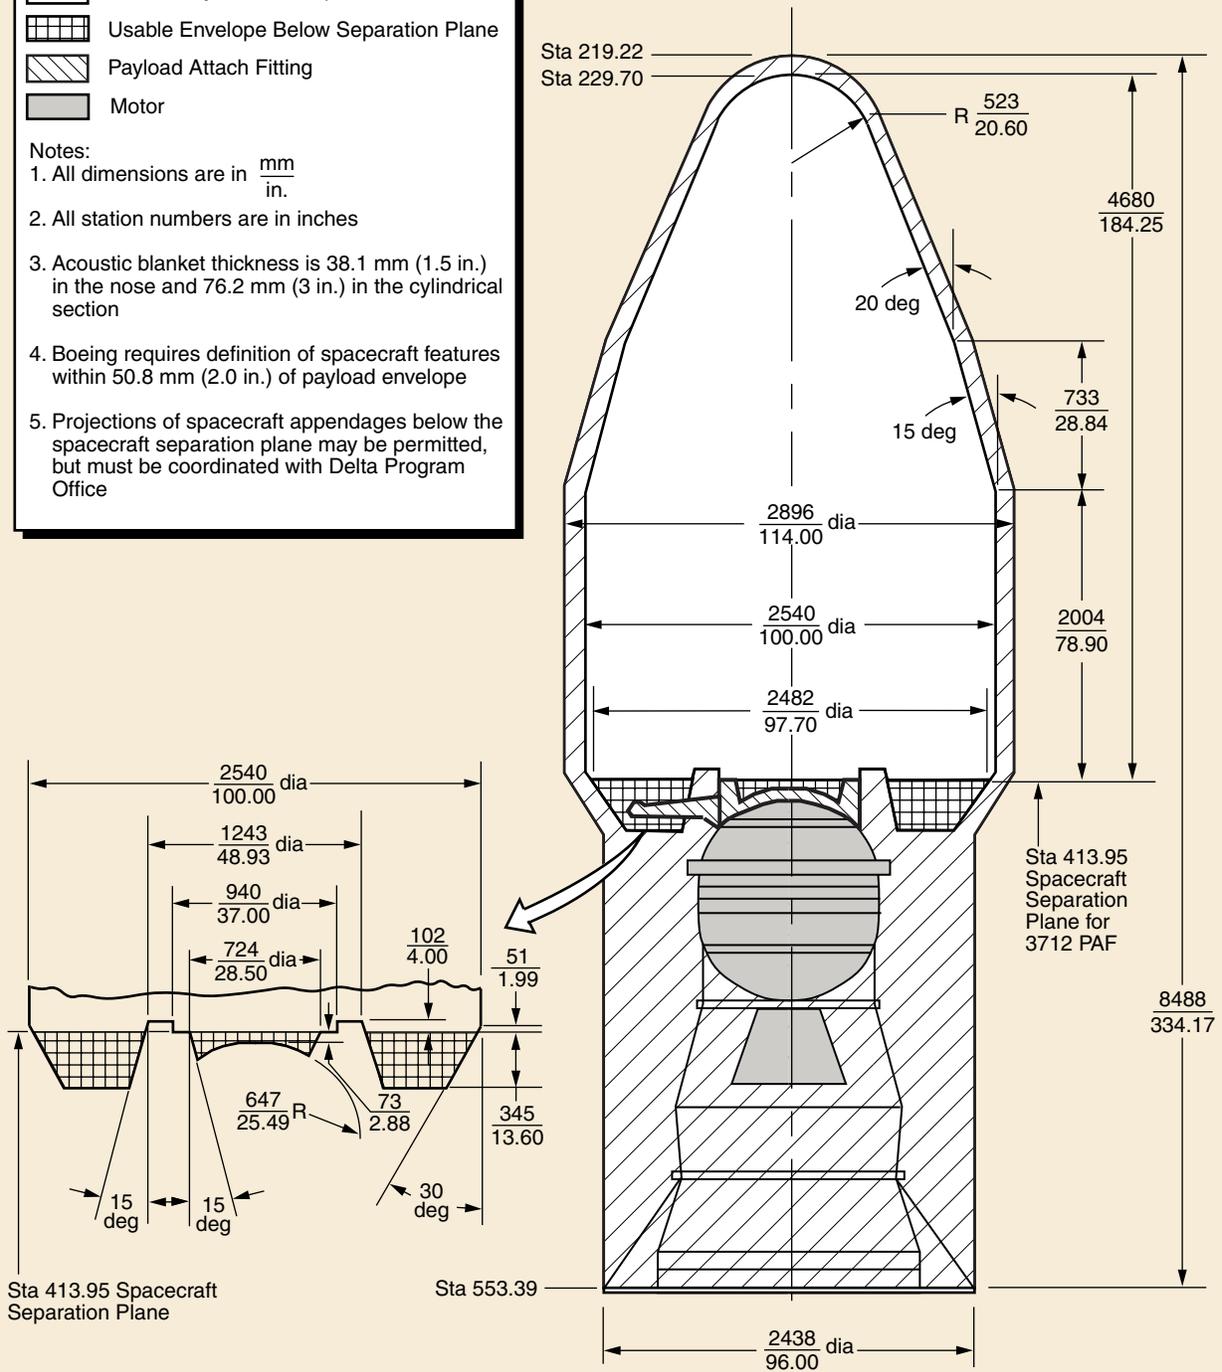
Payload Static Envelope, 2.9-m (9.5-ft)-dia Fairing, Three-Stage Configuration (3712 PAF)
